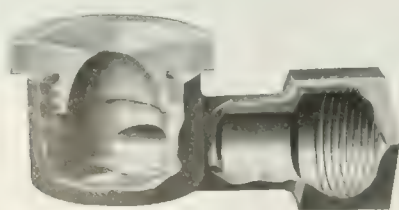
SECTIONAL VIEW OF HUMIDIFIER SPRAY NOZZLE
